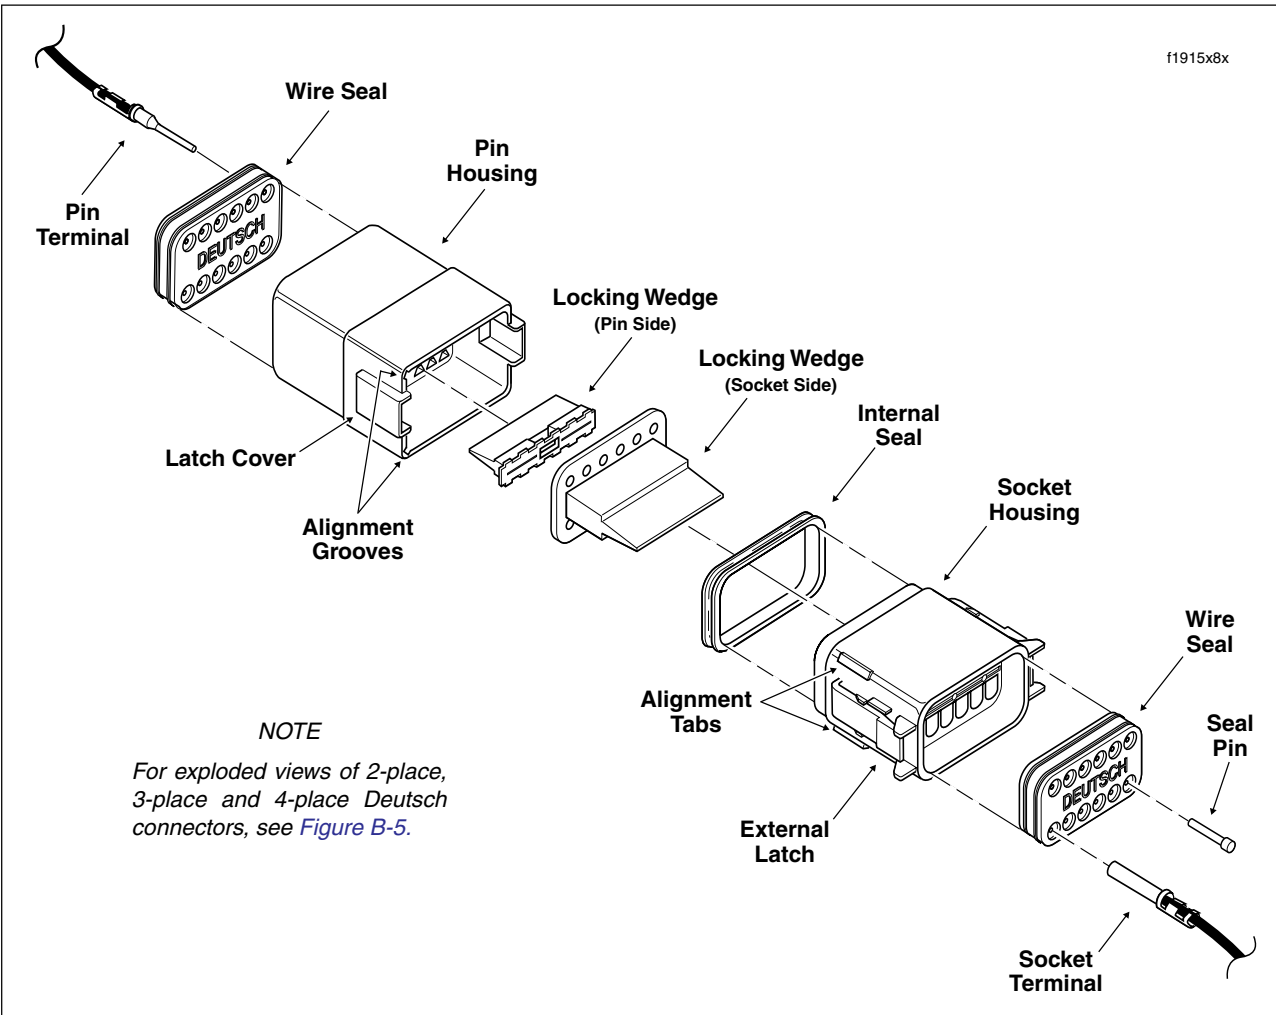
12-Place Deutsch Connector (Exploded View)
